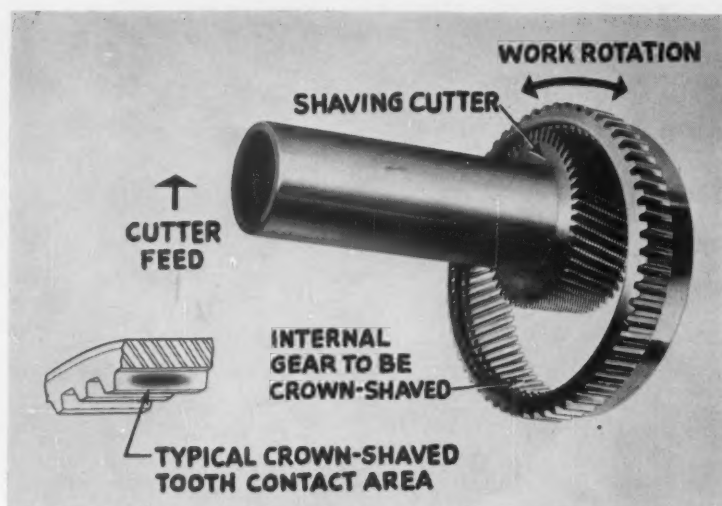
Illustration showing how Red Ring plunge-cut rotary shaving process produces crown-shaved tooth forms on spur and helical internal gears
